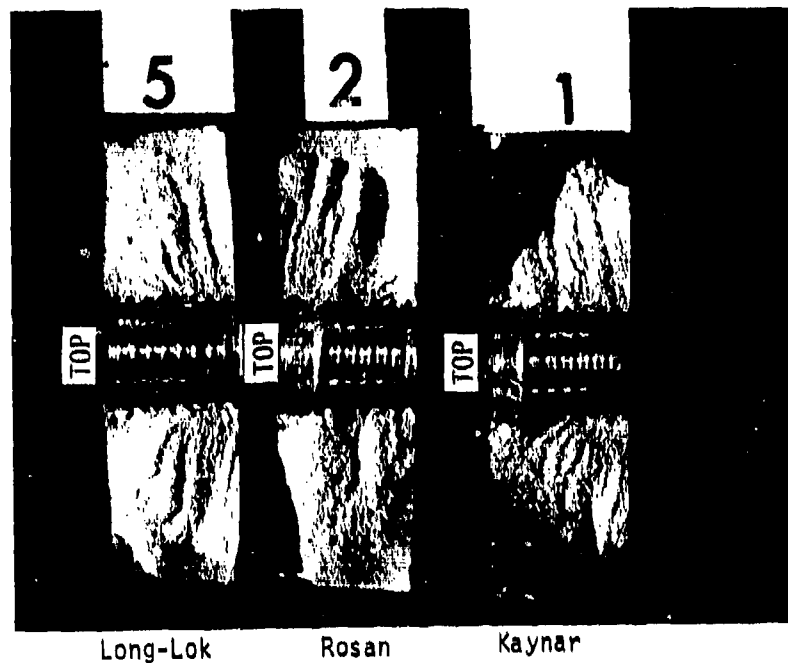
Close-up of Fatigue Failures of Specimens with Long-Lok, Rosan, and Kaynar 10-32 Size Inserts. Inserts Installed by AFML. Torqued Bolts in Inserts During Tests.
